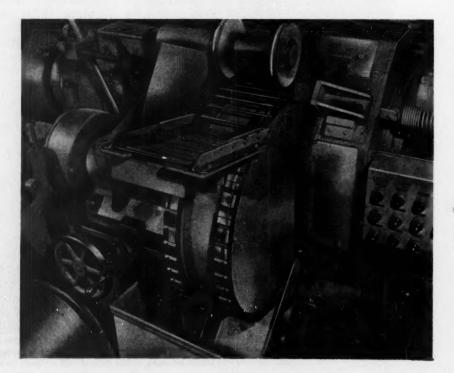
Double-end grinding machine employed for rough-grinding the ball ends and a neck inside of each ball on the valve push-rods.
